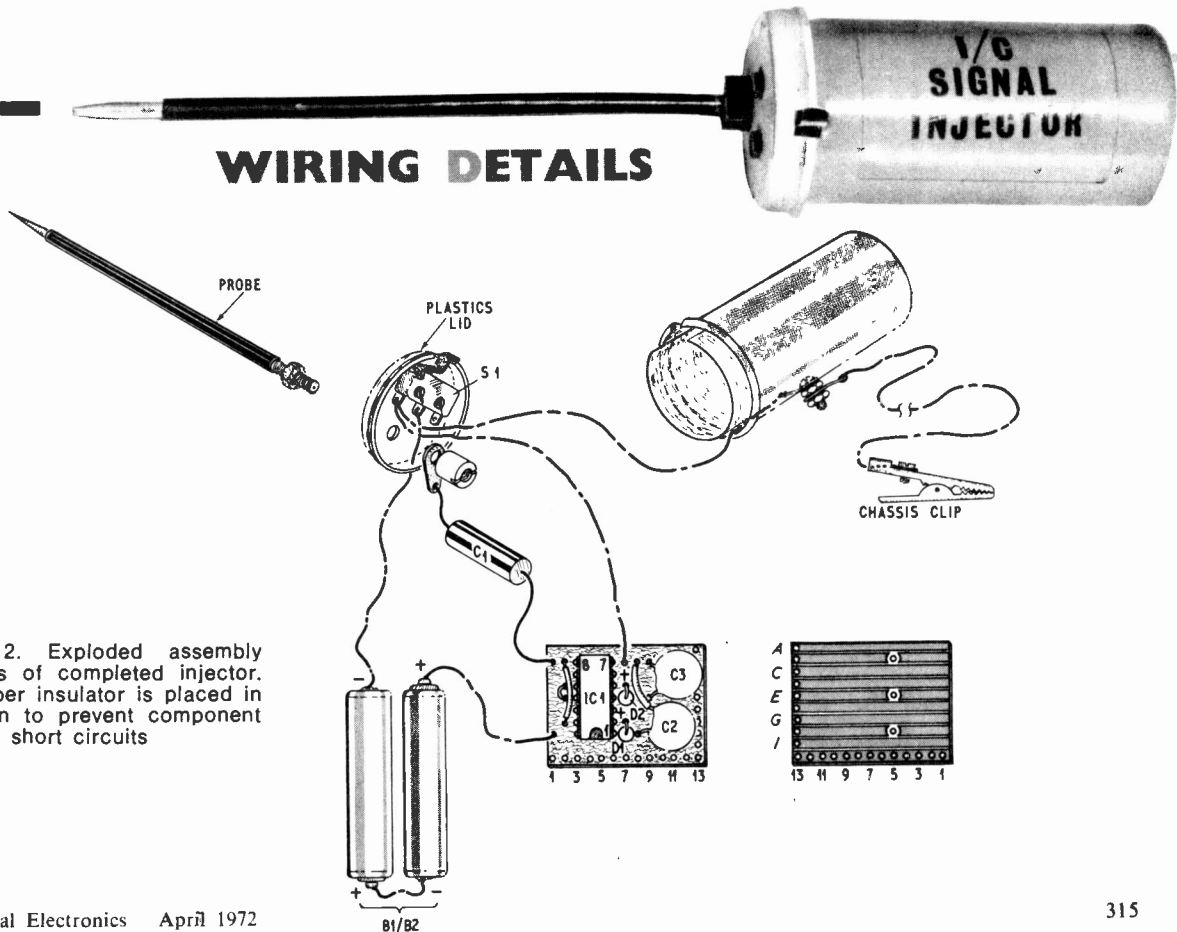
Exploded assembly details of completed injector. A paper insulator is placed in the tin to prevent component board short circuits
